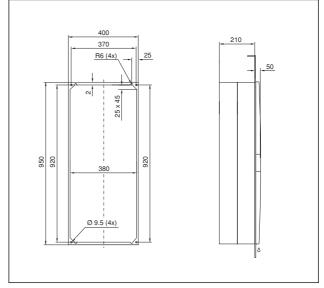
SK 3304.xxx/SK 3305.xxx full internal mounting
